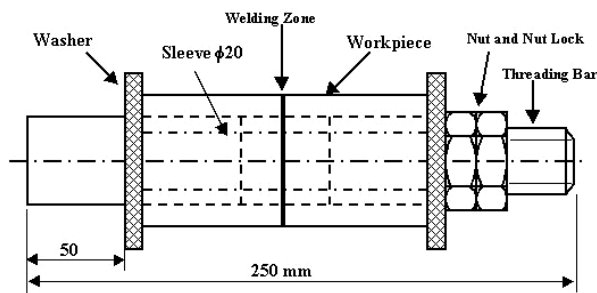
Schematic illustration of an assemble two tubes with backing bar and the tubes rigidly restrained and in position ready for friction stir butt weld.
